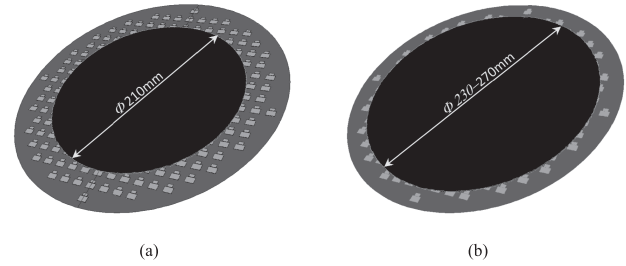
Initial diameter of the molding compound. (a) Original dispensing pattern (standard case). (b) Enlarged dispensing pattern.
